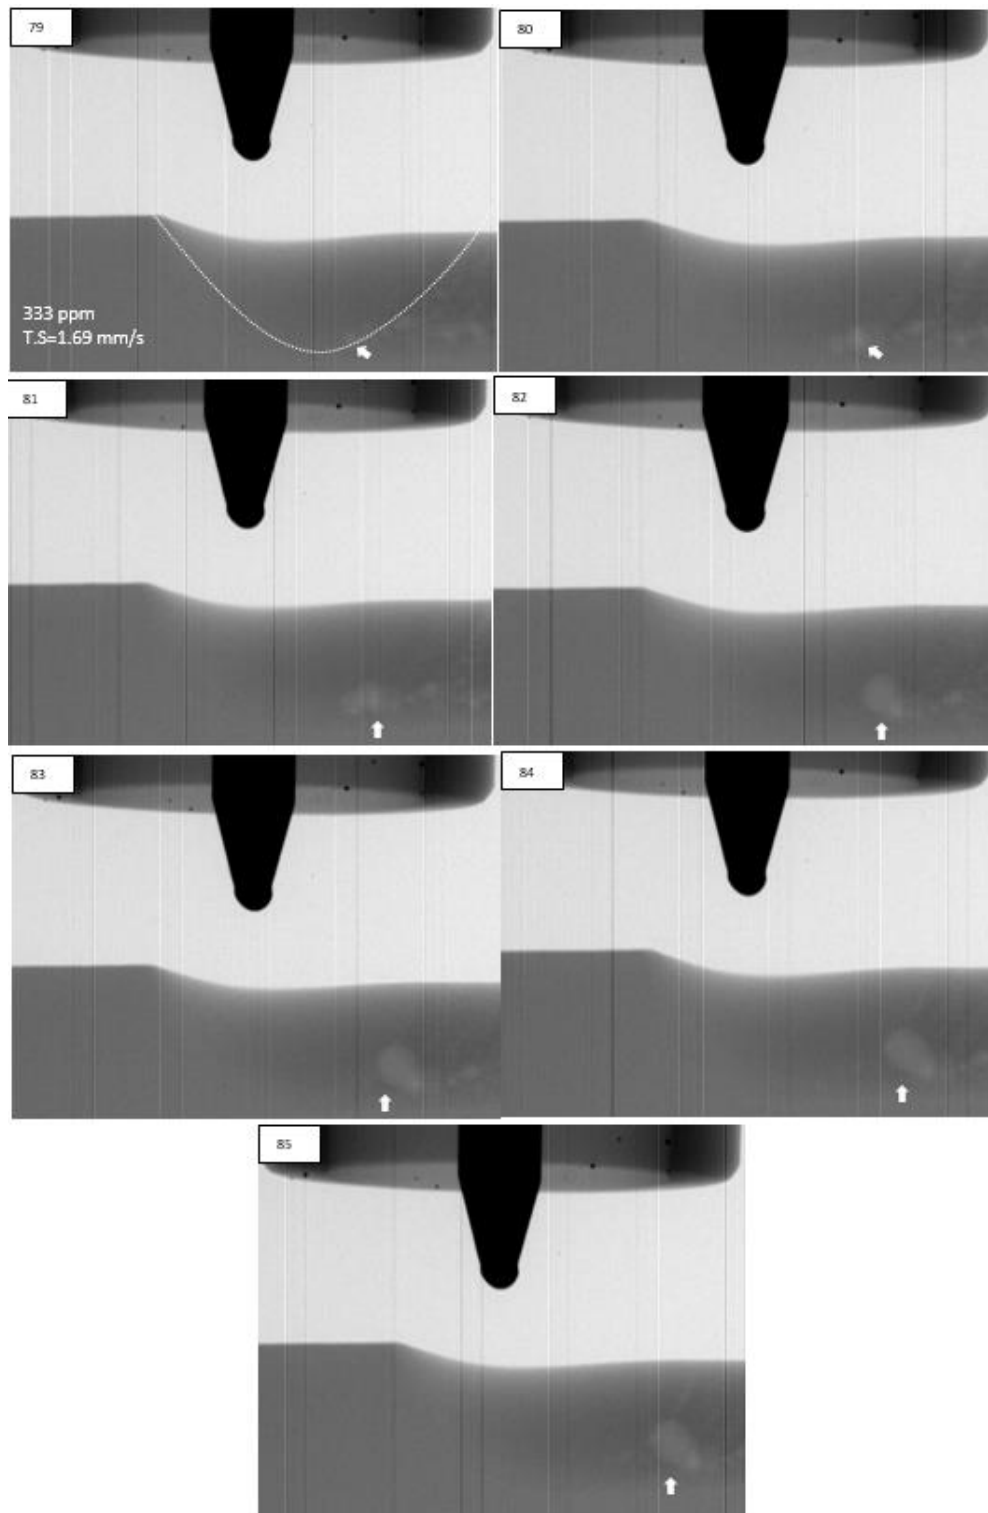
Alloy 1100 welded using 333 ppm of shielding gas hydrogen at 1.69 mm/s.
